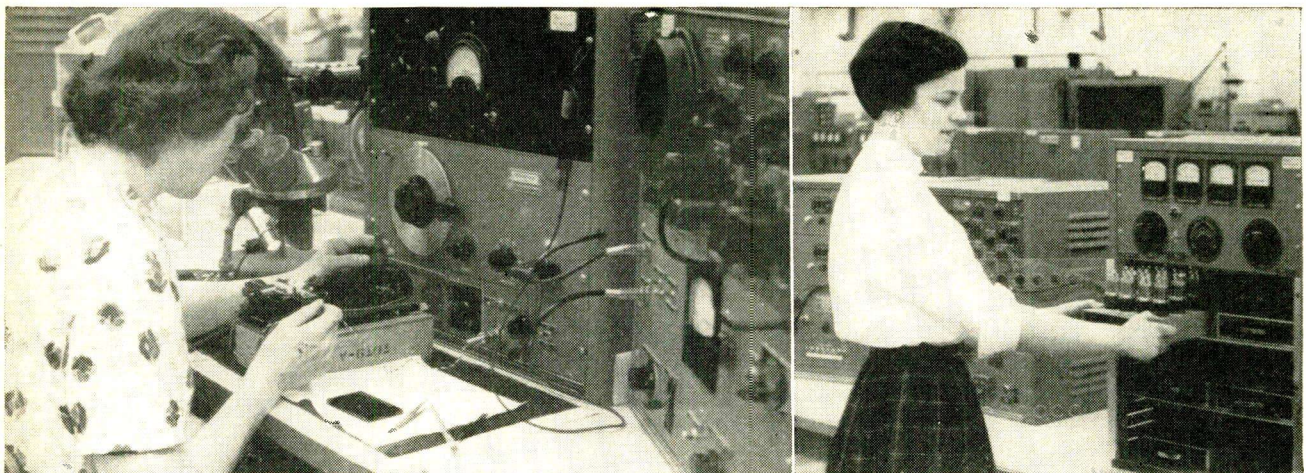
Bonding base lead (left) involves welding fine gold wire to 0.002-in. *p*-region. Operator probes junction with micromanipulator while checking transistor characteristics on oscilloscope. Trays of completed transistors (right) are loaded into racks for 24-hour aging
